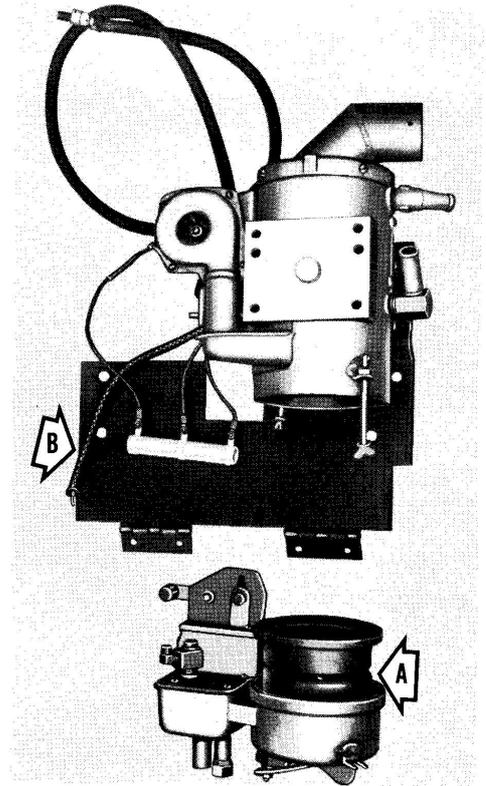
(A) Burner bowl removed. (B) Igniter wire disconnected.
